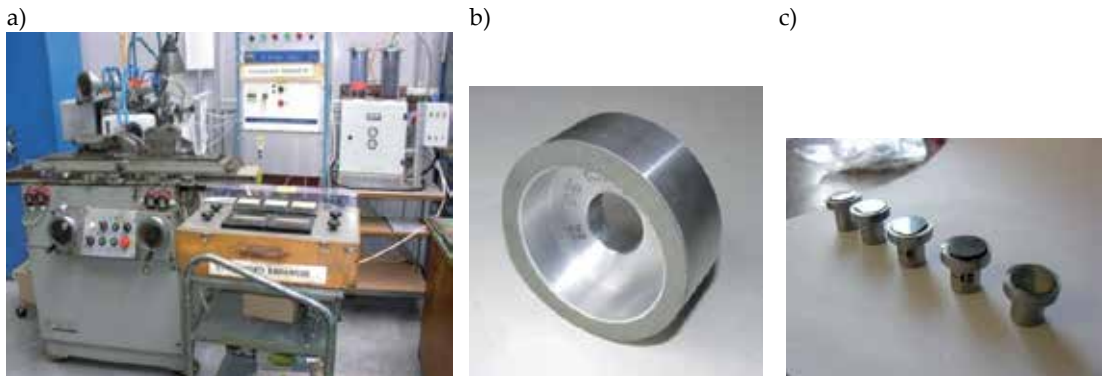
a) The position of a universal tool grinder 3E642 grinding tests with cooling, b) diamond grinding wheel vitrified Ba23 bis c) composites BNDCC intended for research
